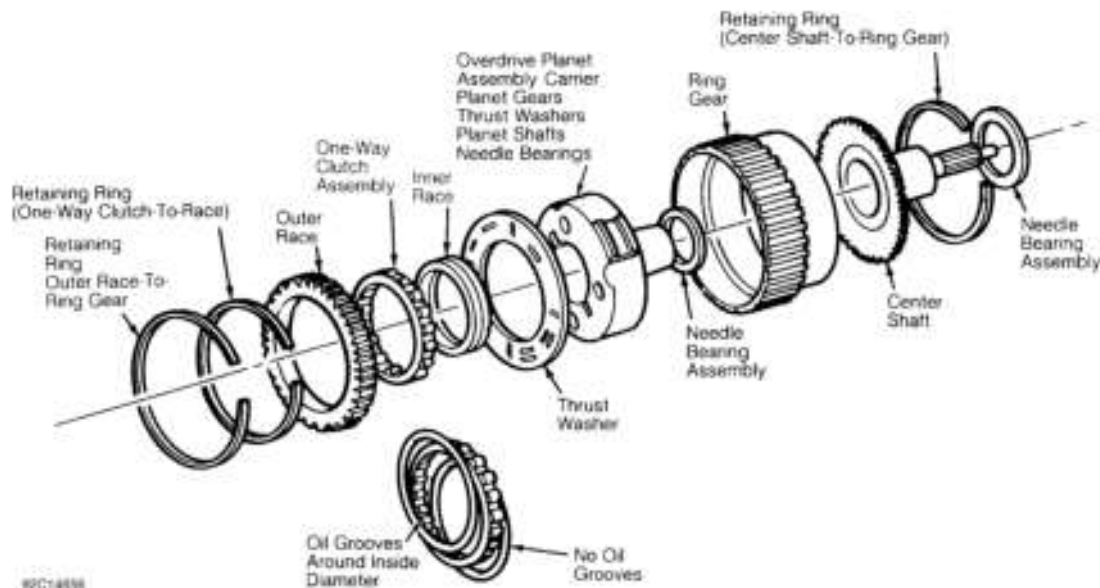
Exploded View Of Overdrive Ring Gear & Center Shaft
